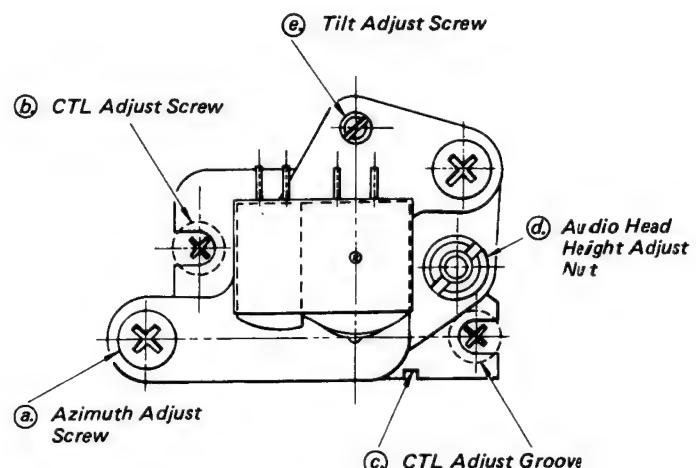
Adjustment Screws of Audio Control Head Assembly
